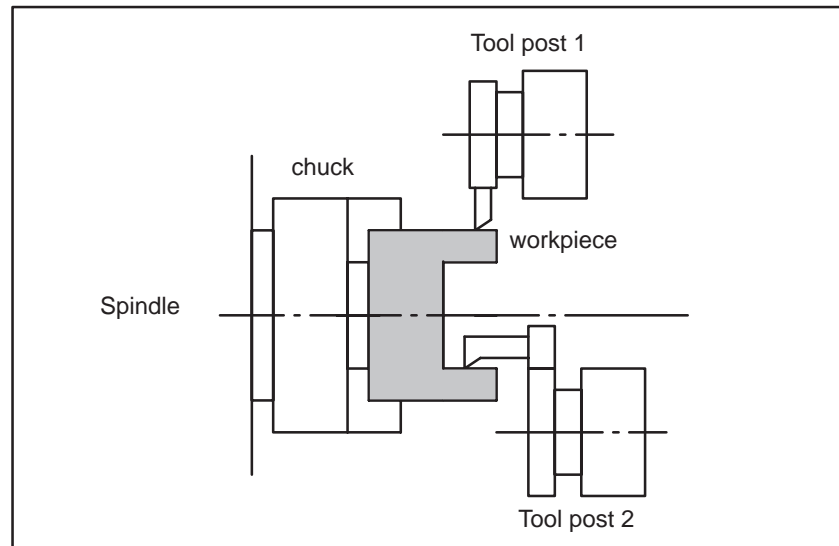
(a) Application to lathes with one spindle and tow tool posts
